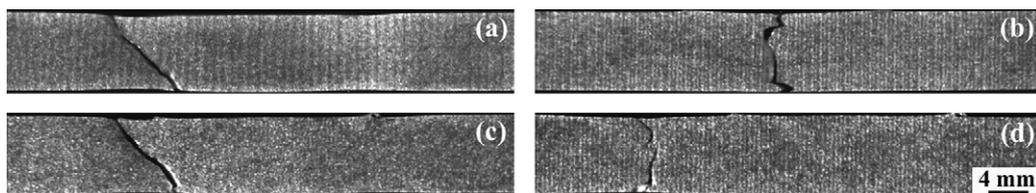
Appearances of failed FSW joints: (a) as-welded butt weld, (b) PW-T6 butt weld, (c) as-welded stir-in-plate weld, and (d) PW-T6 stir-in-plate weld.
